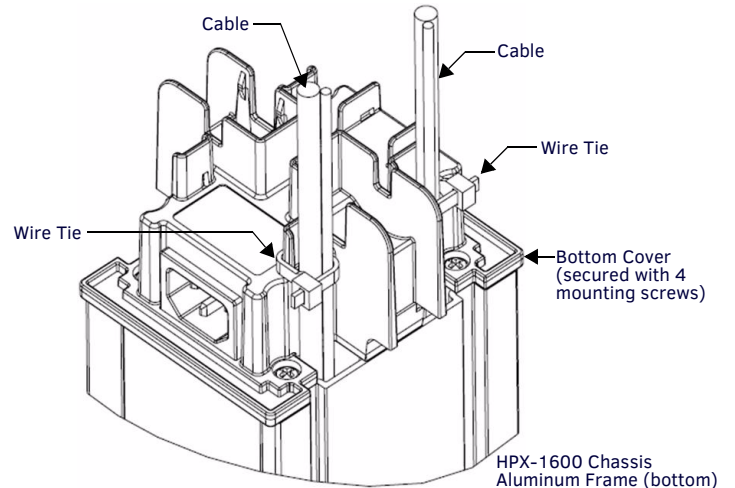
BOTTOM COVER - INSTALLED WITH CABLES EXITING AND SECURED
